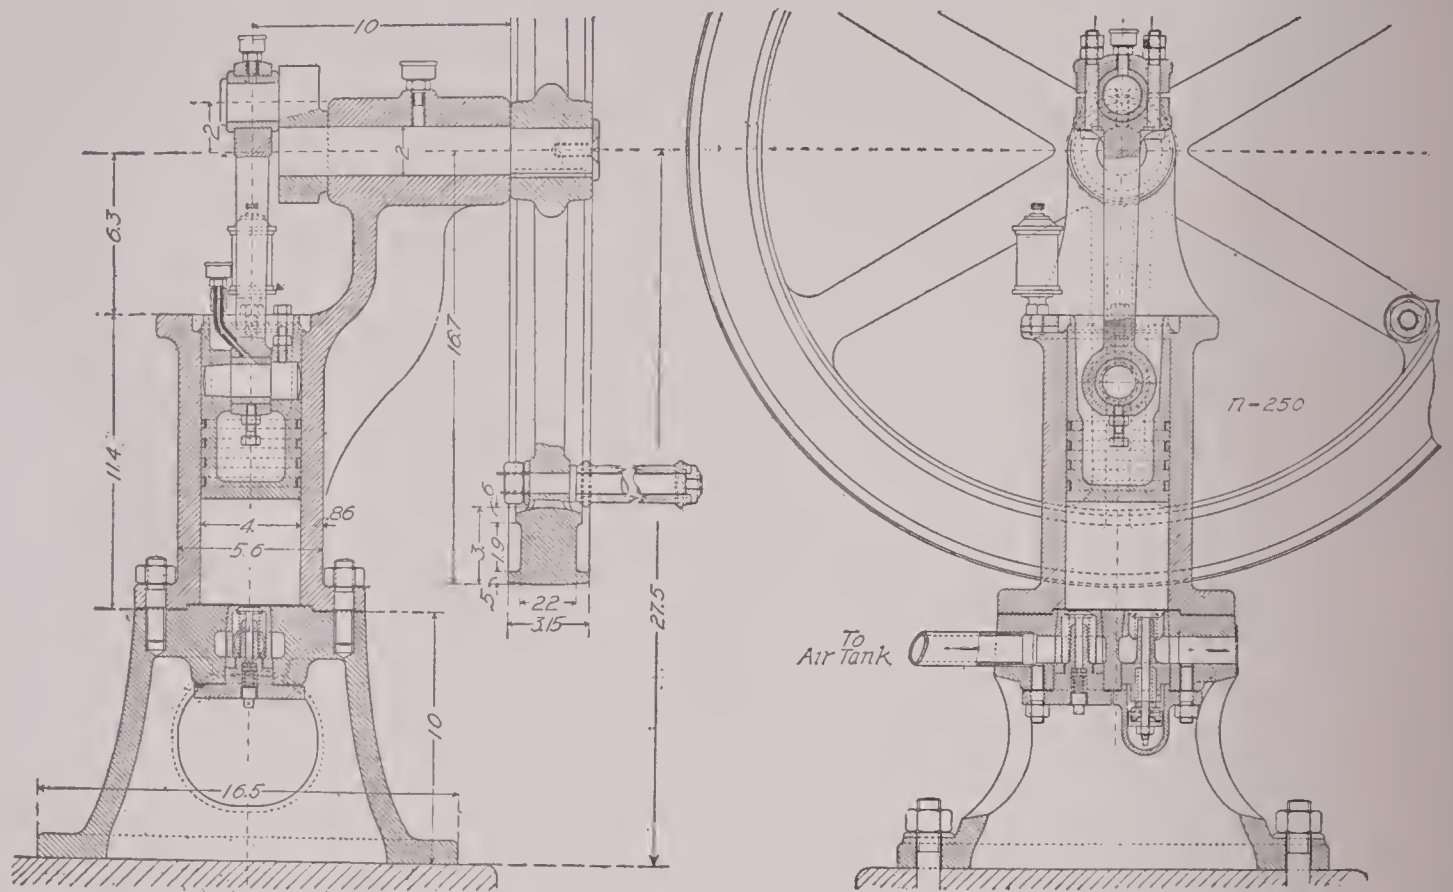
Starting arrangement for a 40–50 H.P. Hornsby-Akroyd Oil Engine.
